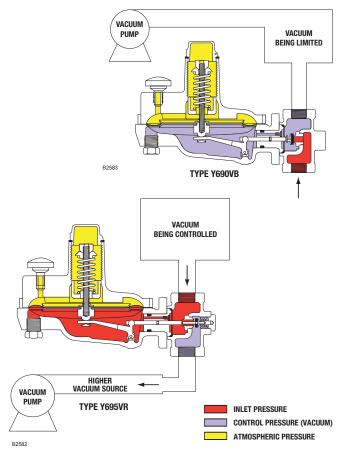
Type Y690VB Vacuum Breaker and Type V695VR Vacuum Regulator Operational Schematics
